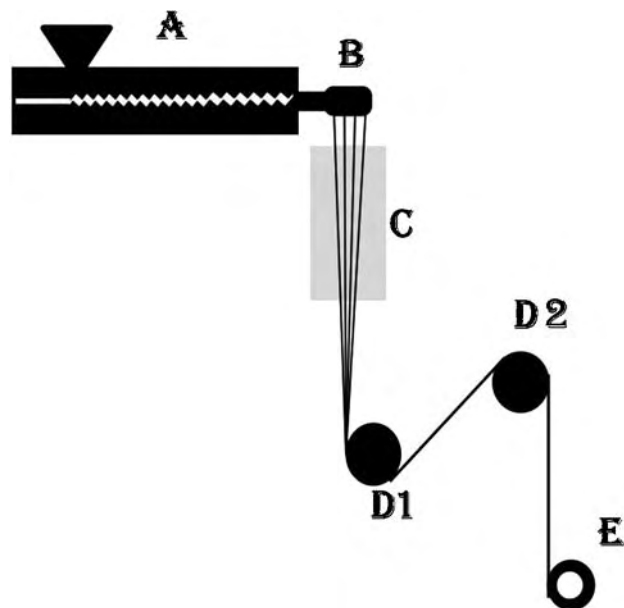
Scheme of a melt-spinning machinery: (A) extruder, (B) spinneret, (C) quenching area, (D1) first drawing unit or godet, (D2) second drawing unit or godet, and (E) winding unit.
